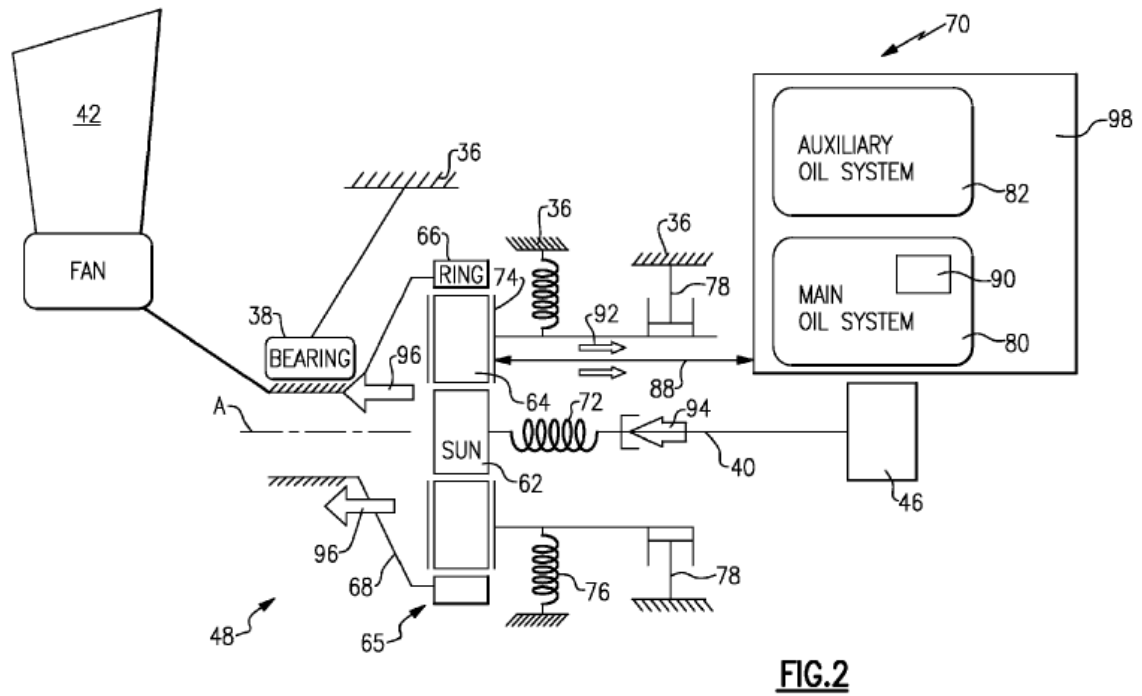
of the '943 patent, above, depicts gear assembly 65 with input shaft 40 and sun gear 62 driving intermediate gears 64, which in turn intermesh with ring gear 66 to drive fan 42. *Id.* at 5:61–6:2. Lubrication system 98, through main oil system 80, supplies lubrication to gears 62, 64, and 66 and in doing so, also cools the gears by removing heat generated in gear assembly 65 via line 88.<sup>1</sup> *Id.* at 6:28–40.
